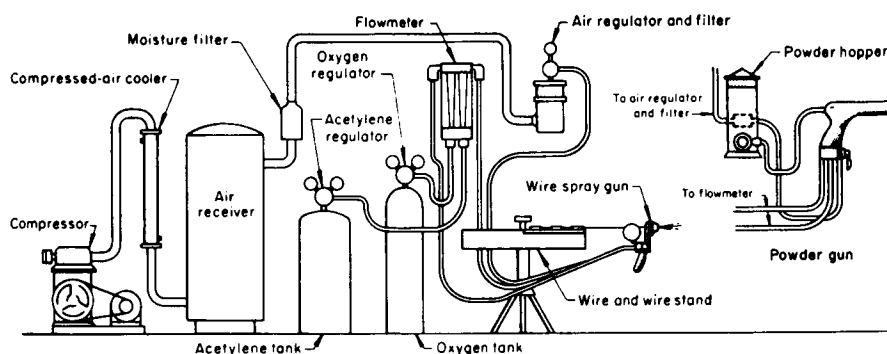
SKETCH OF METALLIZING INSTALLATION FOR FUSED COATINGS (REF. 310)
